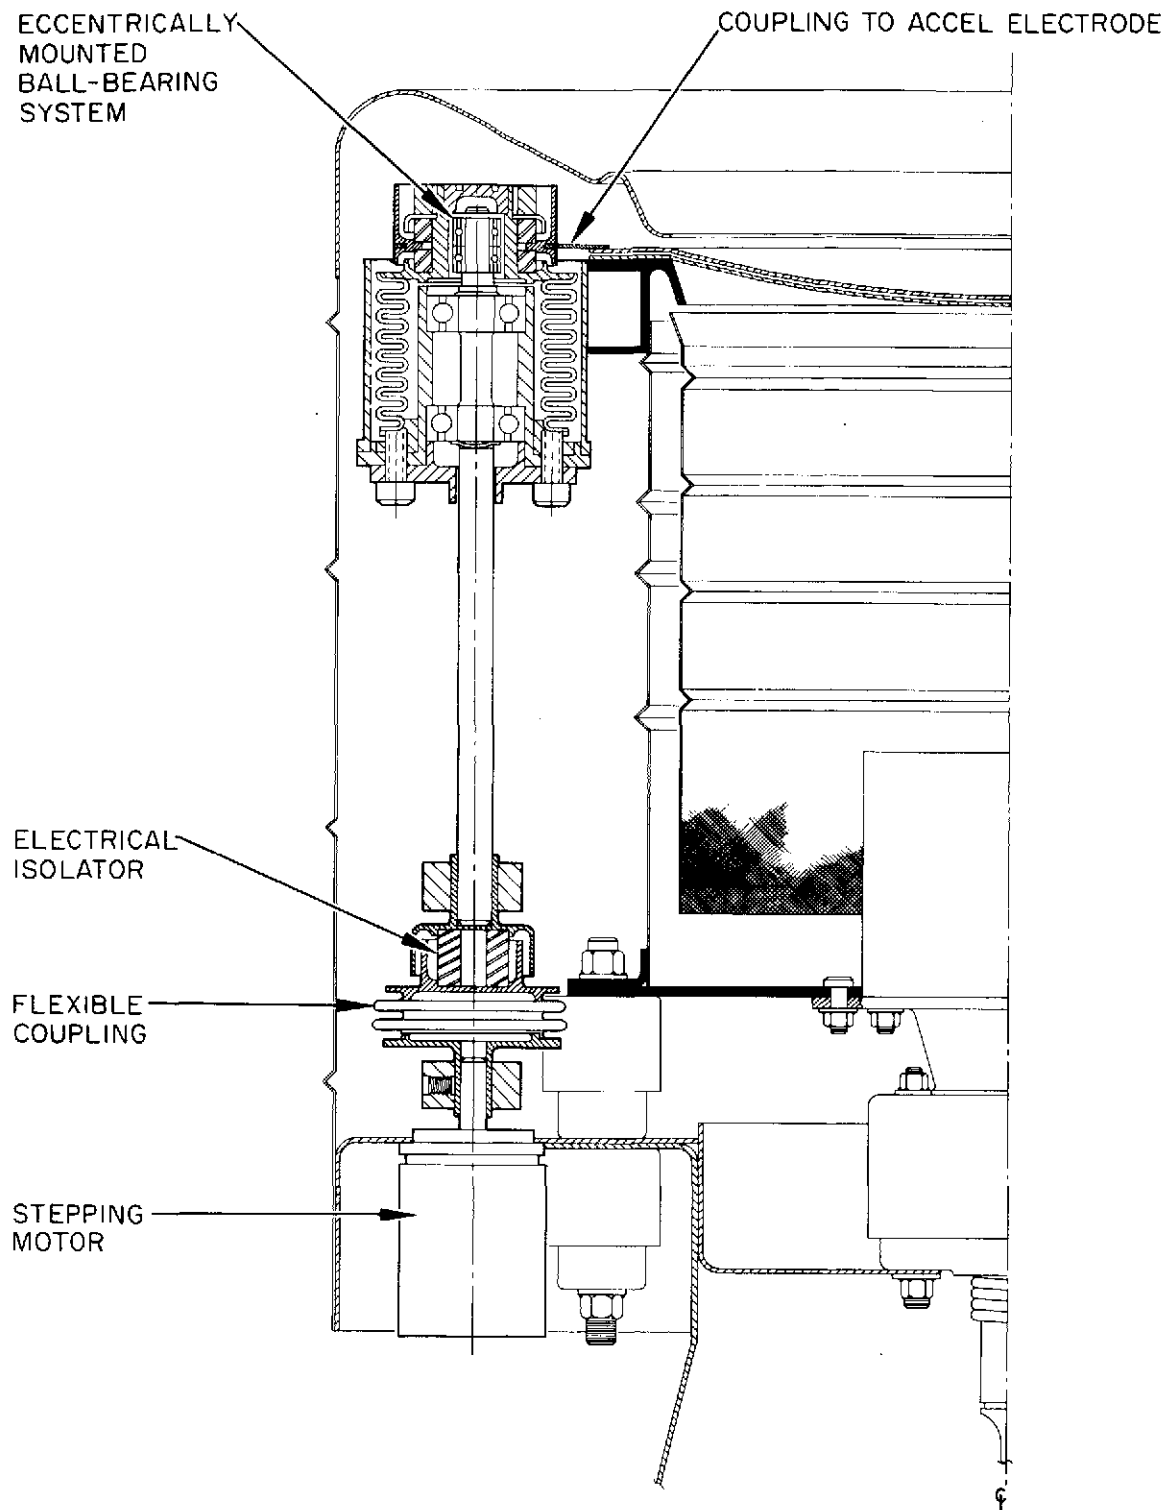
DGVS drive mechanism (shown attached to 8 cm thruster).
